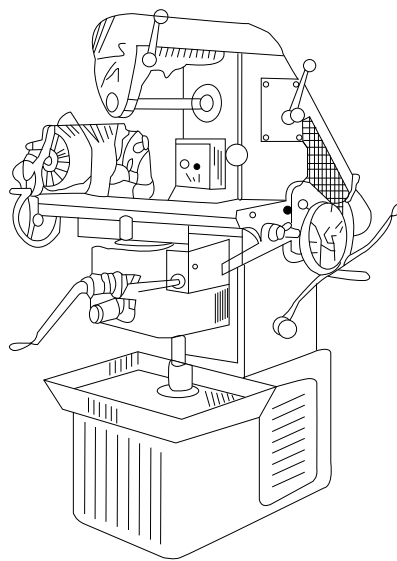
Pictorial view of a Column and knee type milling machine
